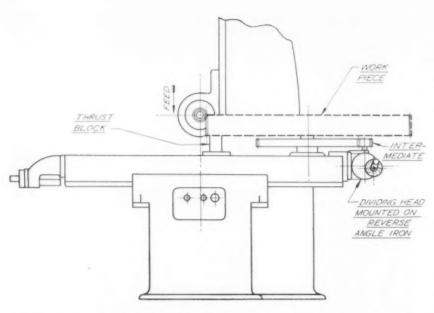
Cutting a large gear on a horizontal mill. See supplemental view in Figure 4.
